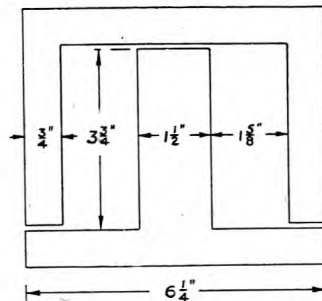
THE DIMENSIONS OF THE STAMPINGS USED FOR THE TRANSFORMER.
